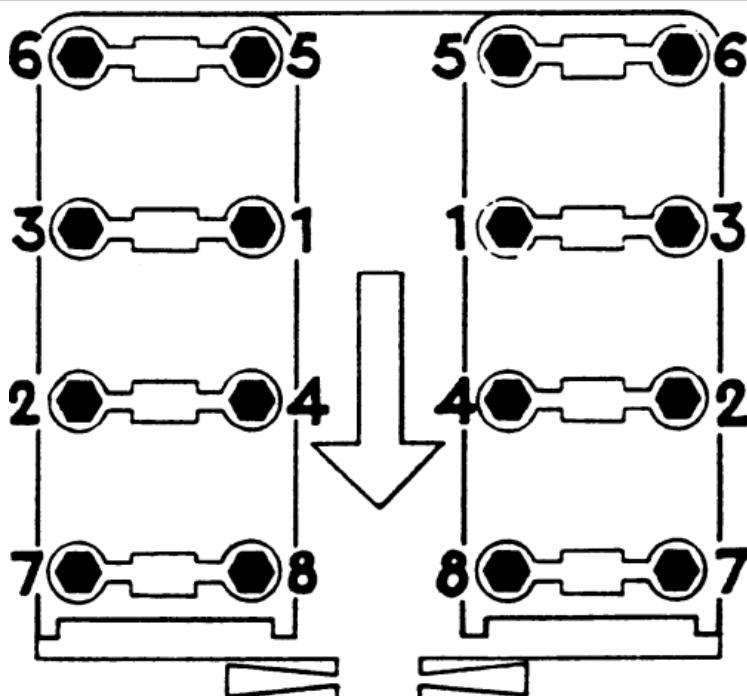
2.8L 6-cylinder engine cylinder head bolt tightening sequence
